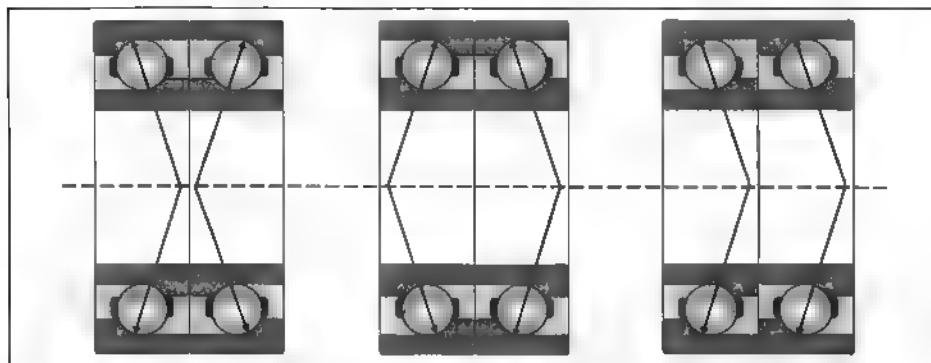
Three different configurations of duplex. From left to right: back-to-back with the inner faces clamped together; face-to-face with the outer races clamped together and tandem.
